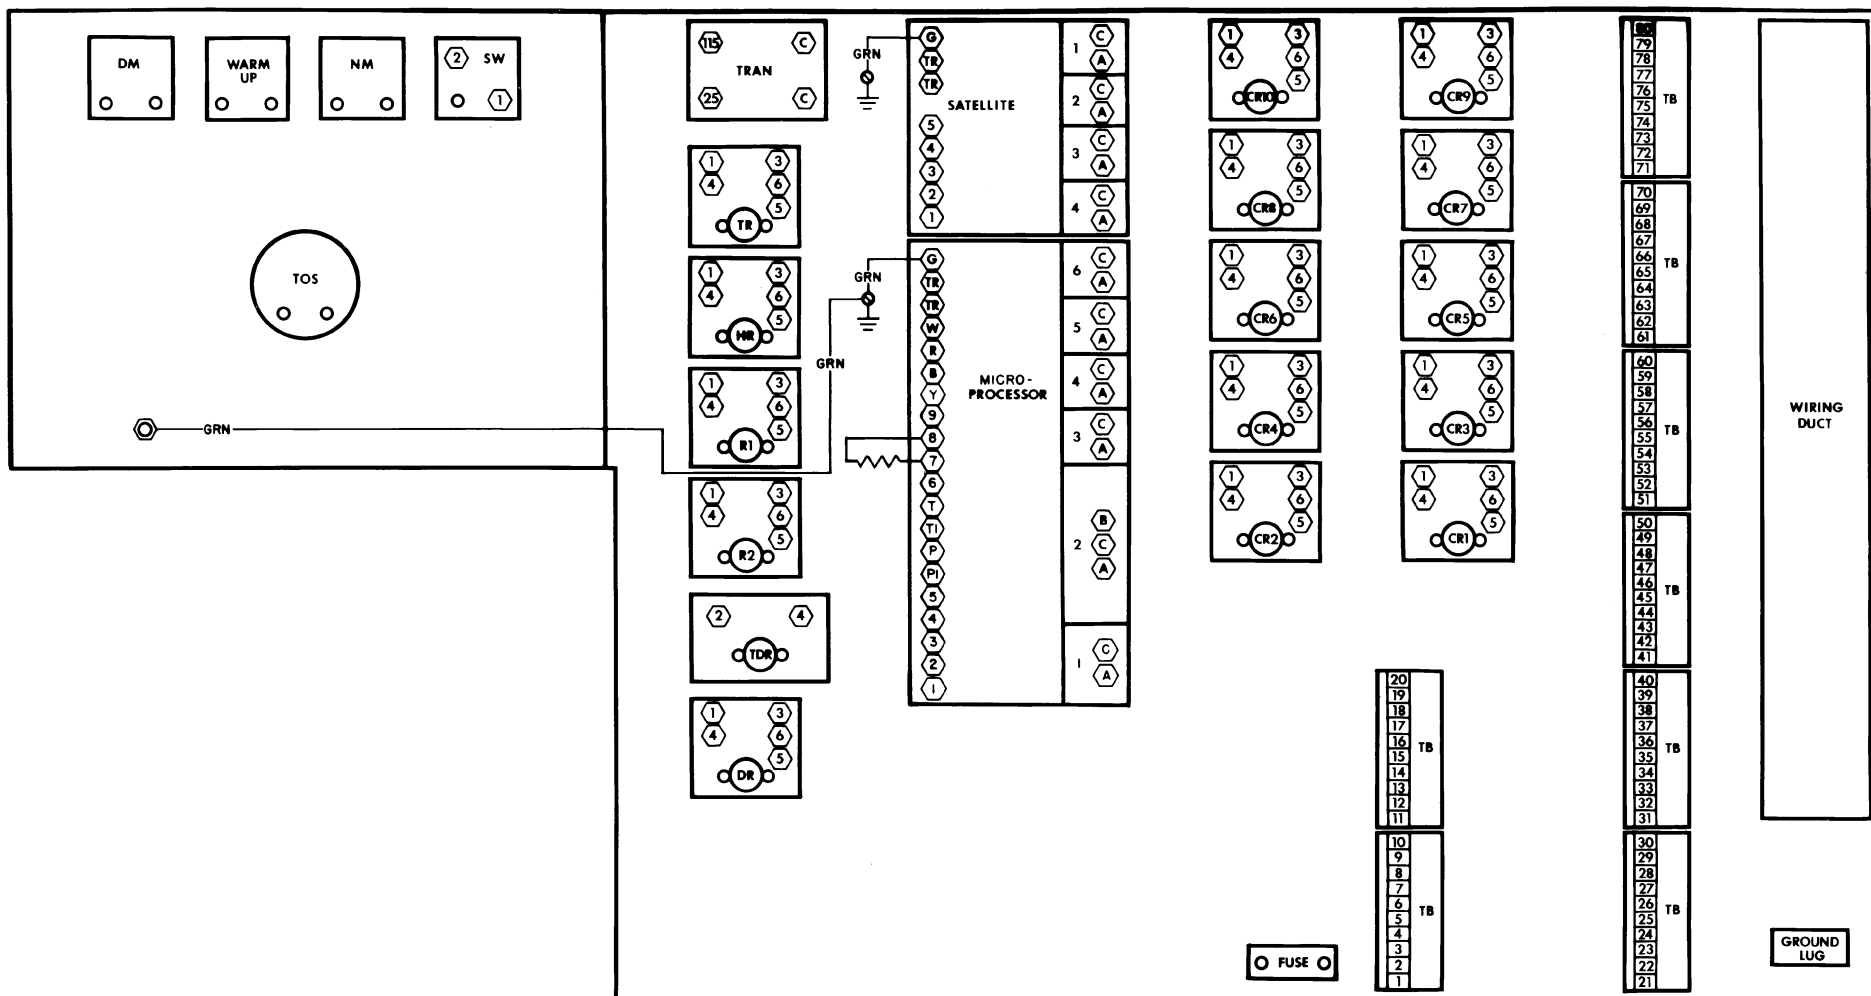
Label Diagram, Component Arrangement; ModuPanel™ Controller
